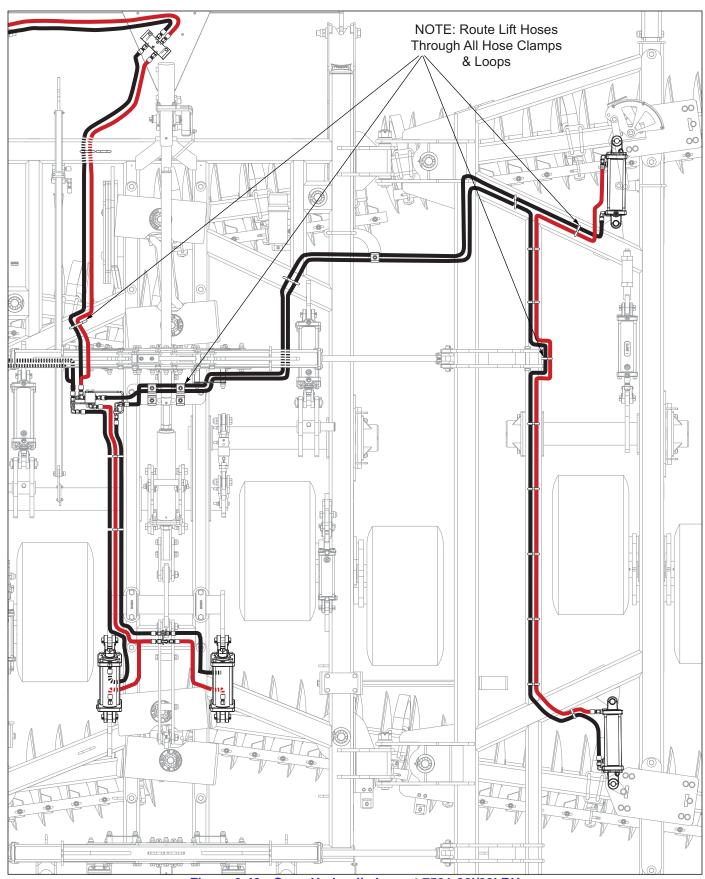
Gang Hydraulic Layout 7531-26'/29' RH
